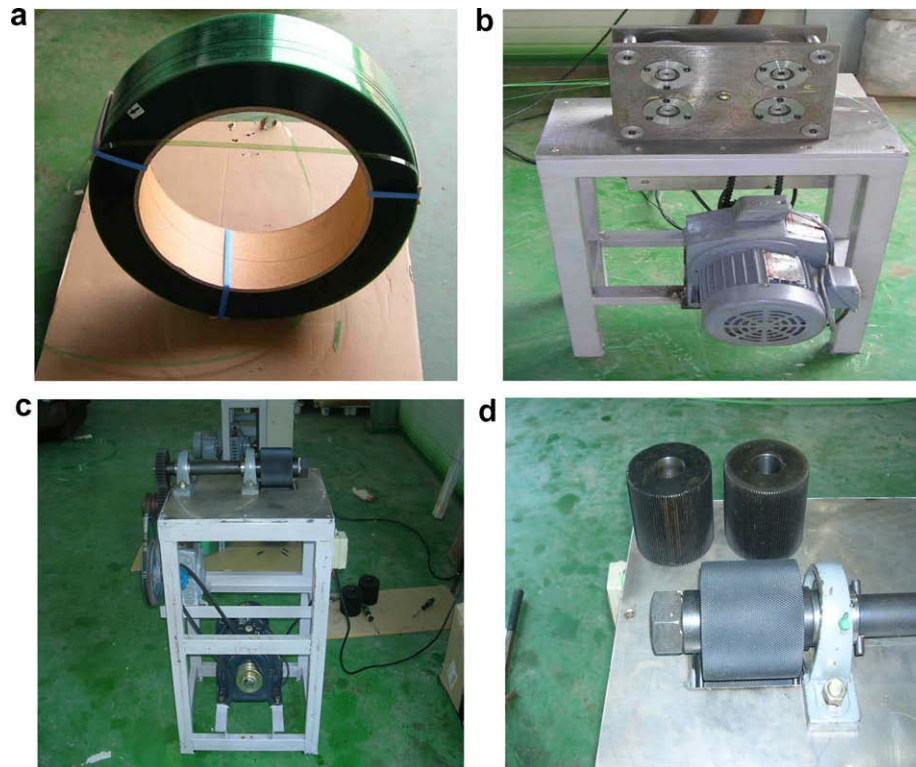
Manufacturing system of recycled PET fibers; (a) recycled PET sheet; (b) slitting machine; (c) deforming machine; (d) gear of deforming machine.
